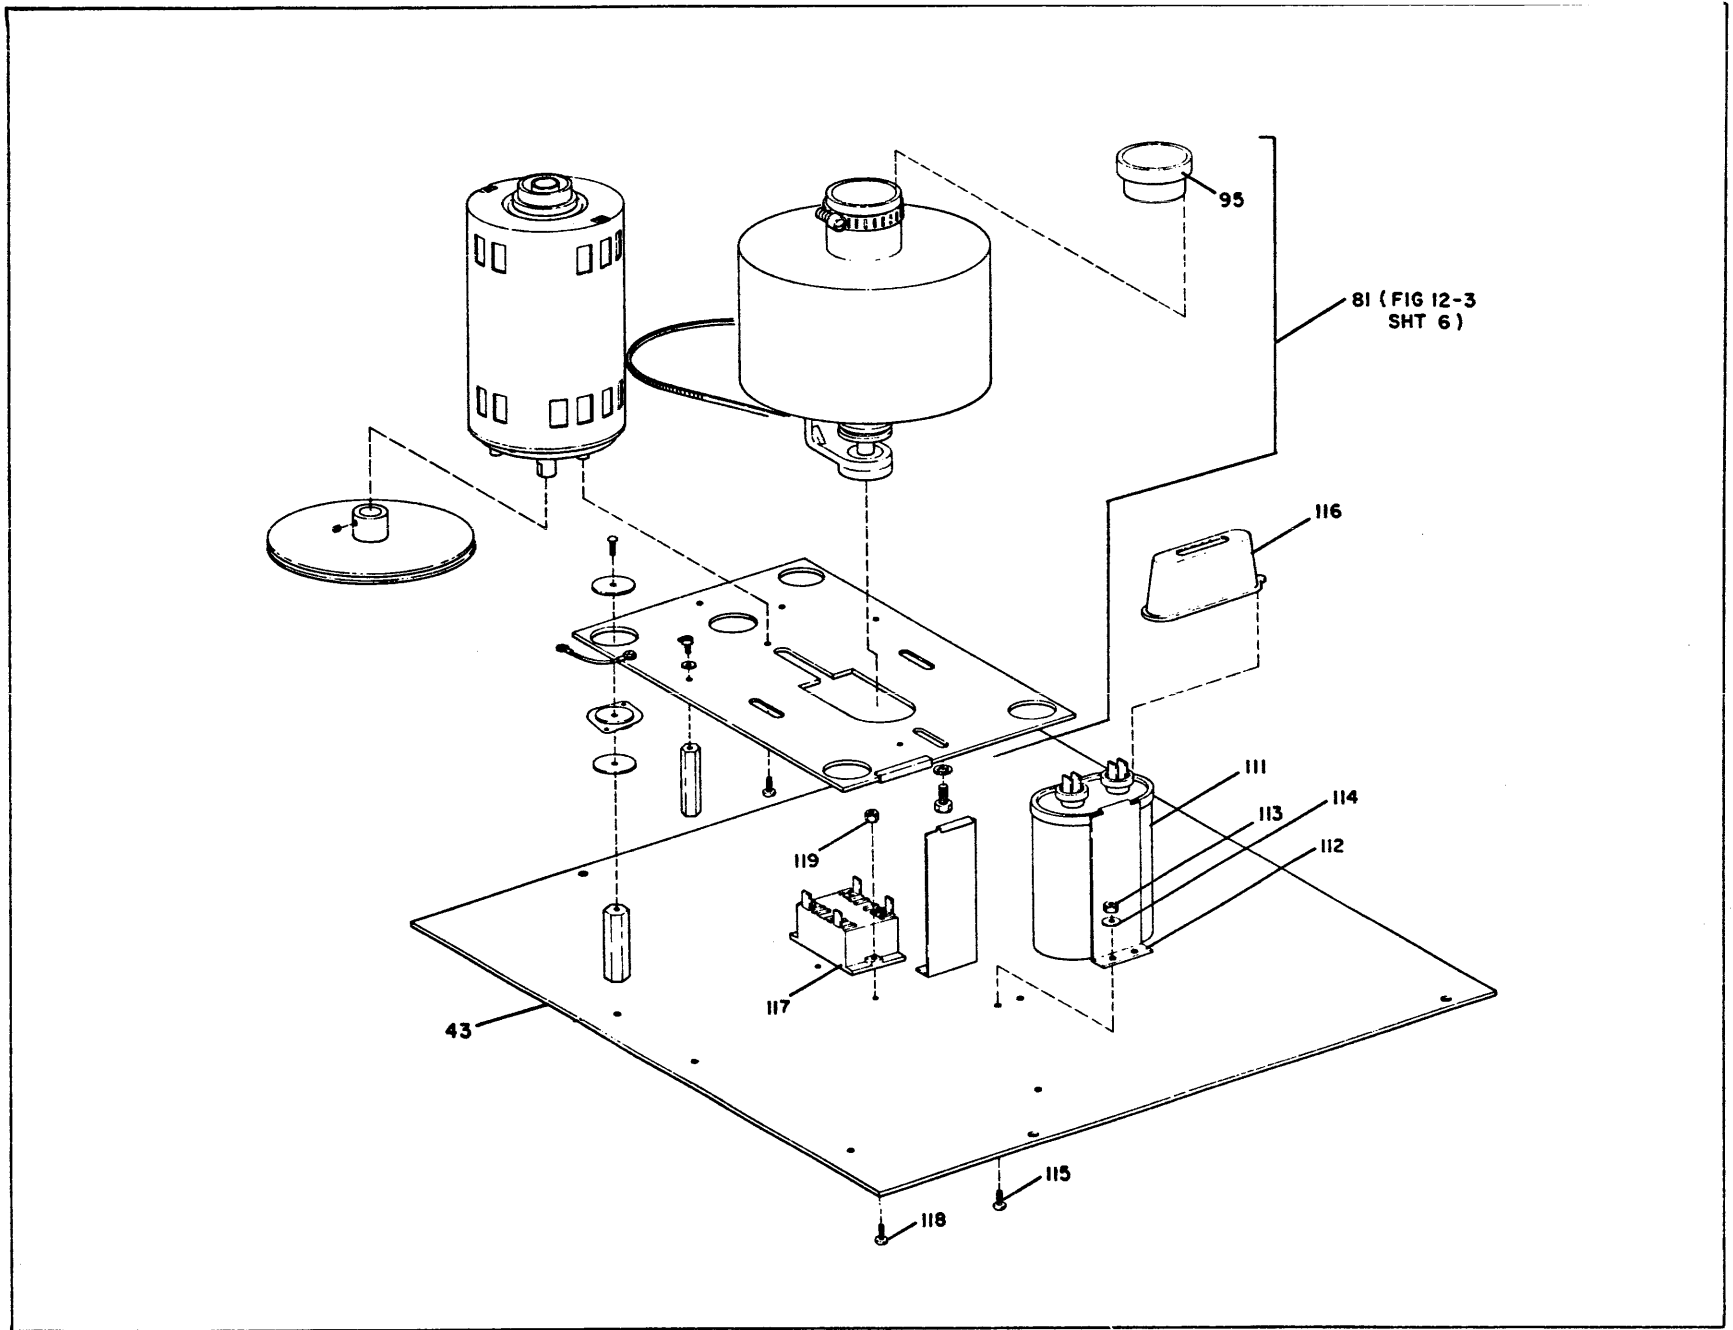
TRIM GROUP ASSEMBLY (sheet 5 of 6)
